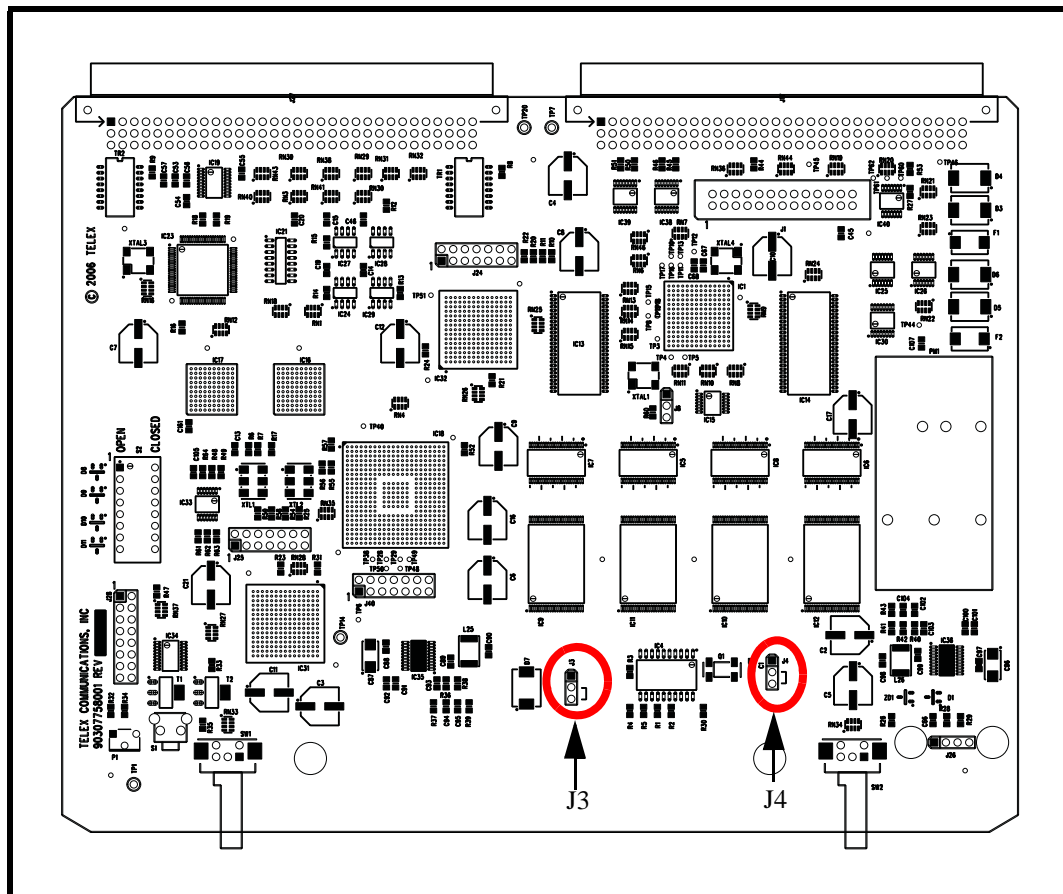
Cronus Master Controller board (9030-7785-001)
